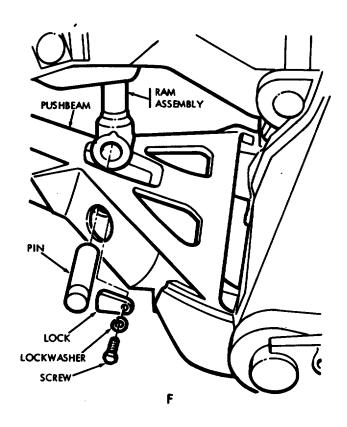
Removal or installation of cylinder assembly and guards (sheet 2 of 2).
